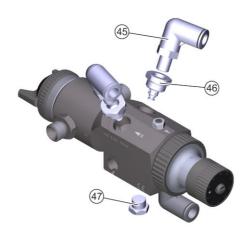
Exploded view robot accessories (RC spray gun variant)
